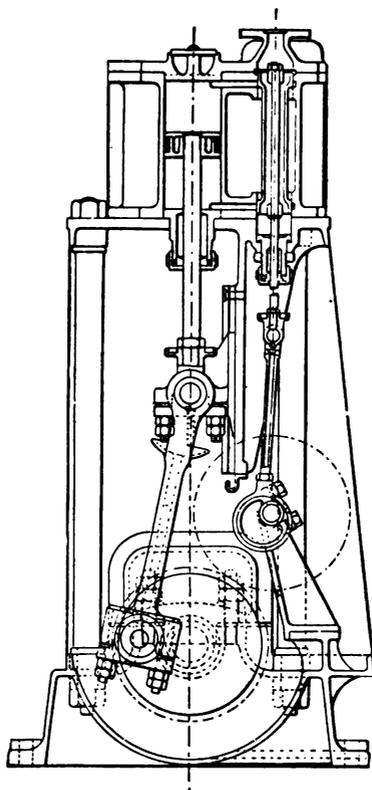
SECTIONAL VIEW OF COULTHARD'S HIGH SPEED TRIPLE EXPANSION ENGINE.
